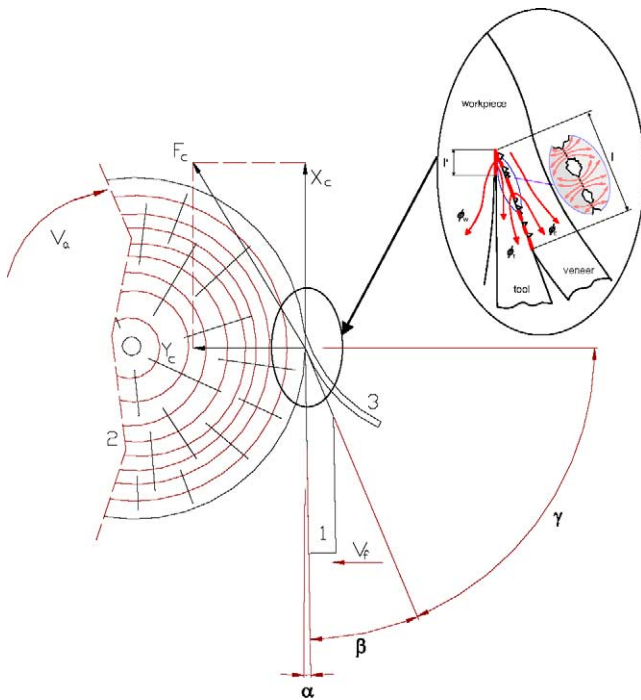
Peeling process—schema of the cutting configuration: 1—knife, 2—workpiece, 3—veneer, V_a —workpiece movement (angular speed), V_f —feed, α —clearance angle, β —tool angle, γ —rake angle, F_c —cutting force. Zoom on the tool-chip-workpiece interface: ϕ_c —heat flux in the veneer, ϕ_t —heat flux in the tool, ϕ_w —heat flux in the workpiece, l —tool-veneer contact length at the rake face, l' —tool-workpiece contact length at the clearance face.
